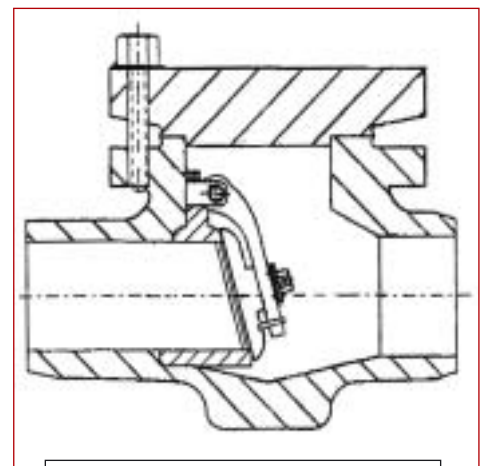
18" ASME/ANSI Class 900 swing check valve
